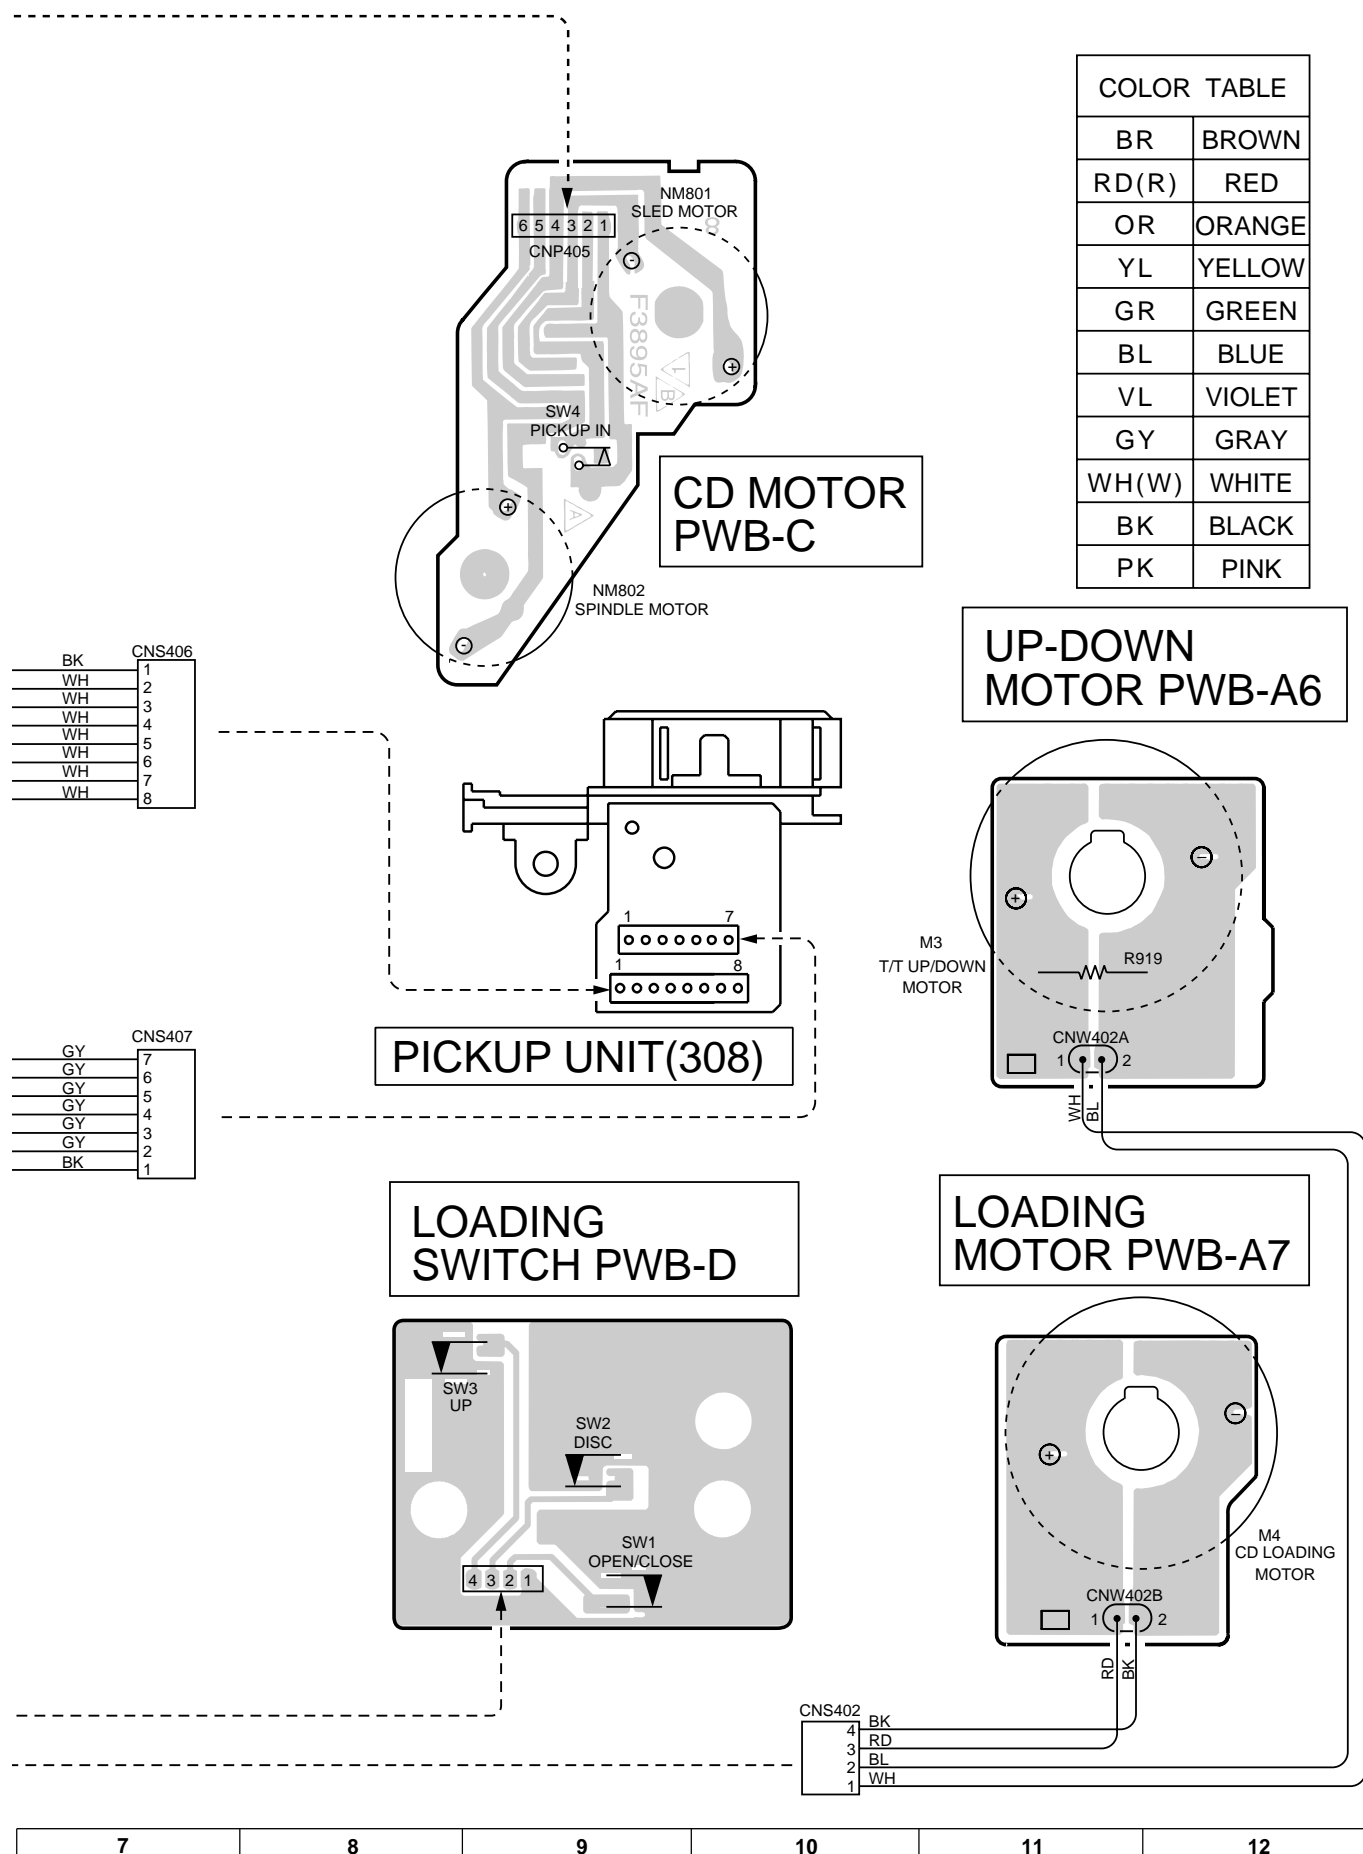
WIRING SIDE OF P.W.BOARD (4/8)
